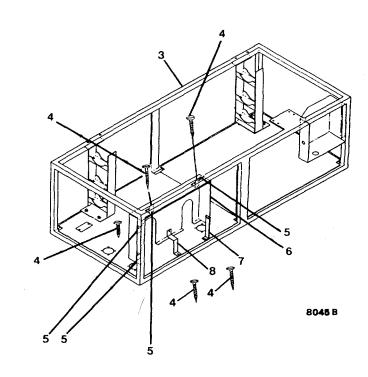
Motor and Pump Assembly Repair (Sheet 2 of 3).
